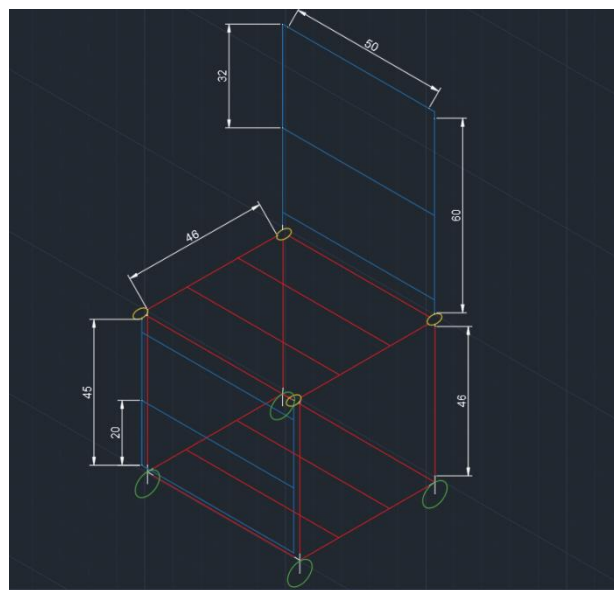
Isometric Line Diagram of wheelchair with link dimensions using AutoCAD
